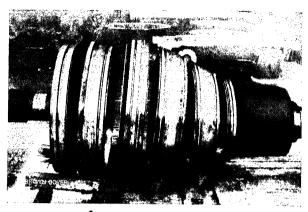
Discs and shaft ends of a welded turbine rotor, before welding.
